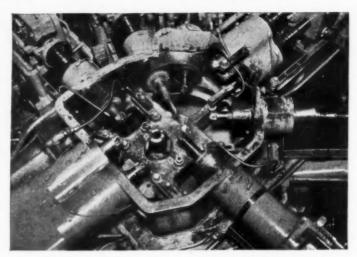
Here is a closeup of the fixture on the rough boring machine as seen by the operator. The tools have been advanced to cutting position. This view gives a comprehensive idea of the magnitude of the operation necessary to produce the accessory housings of the V-1710 engine.
